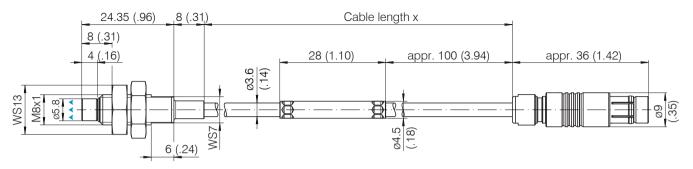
Dimensional drawing sensors ES-U2-C-CAx/mB0, dimensions in mm (inches)
